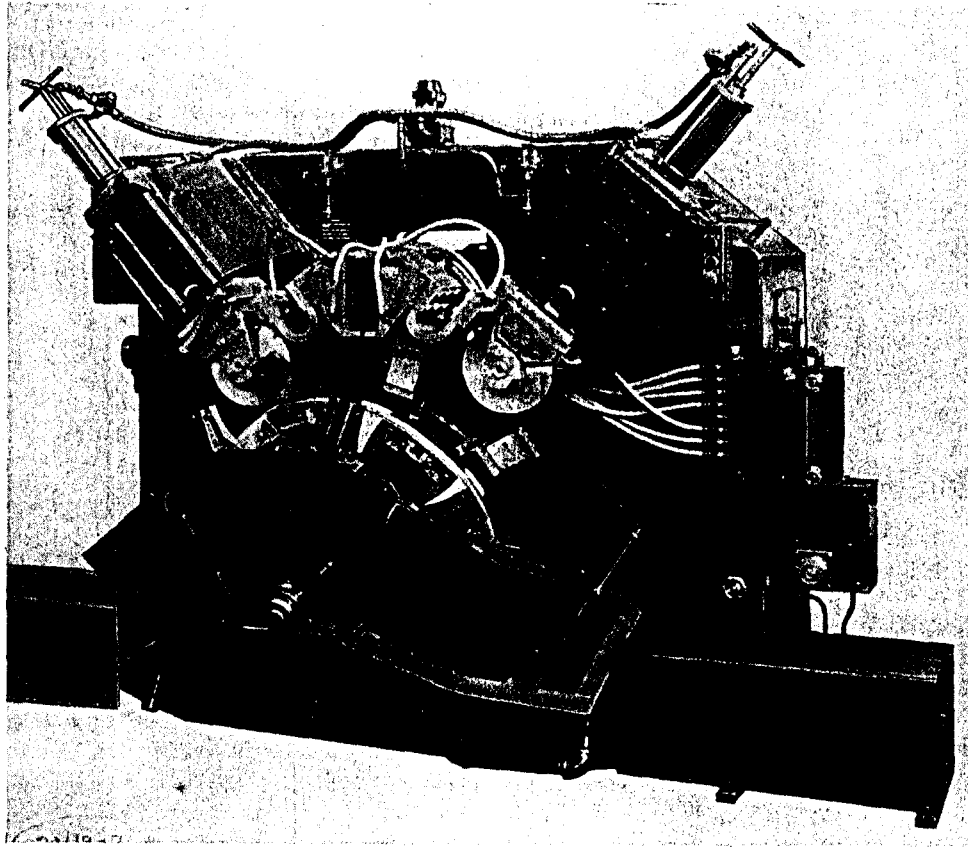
Traveling Fixture Seam Welding Machine with Two Electrodes in Tandem
